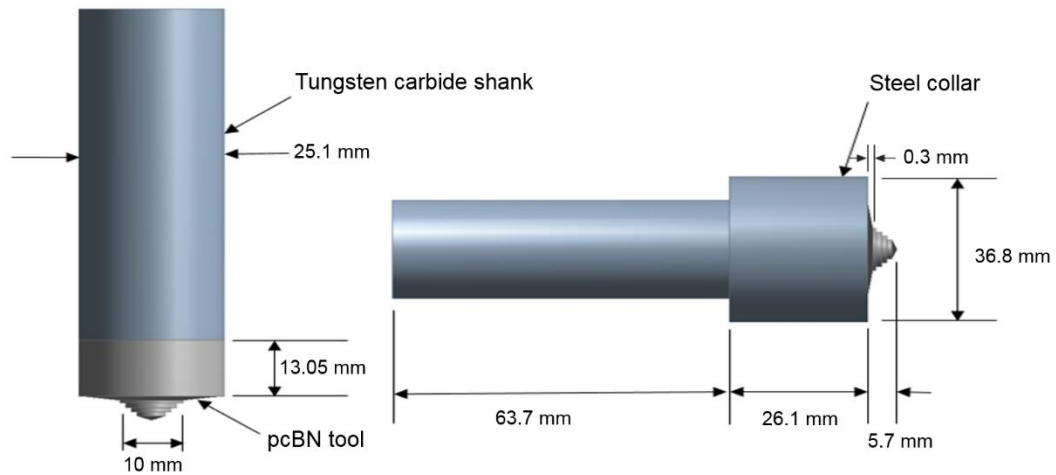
FSW tool geometrical dimensions [4.1,4.6].
